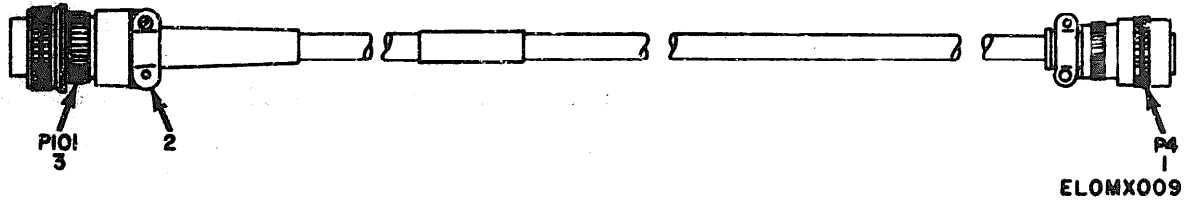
Cable Assembly, Special Purpose, Electrical, CX-7591/ASM-63 998962-01-01 (W6).
